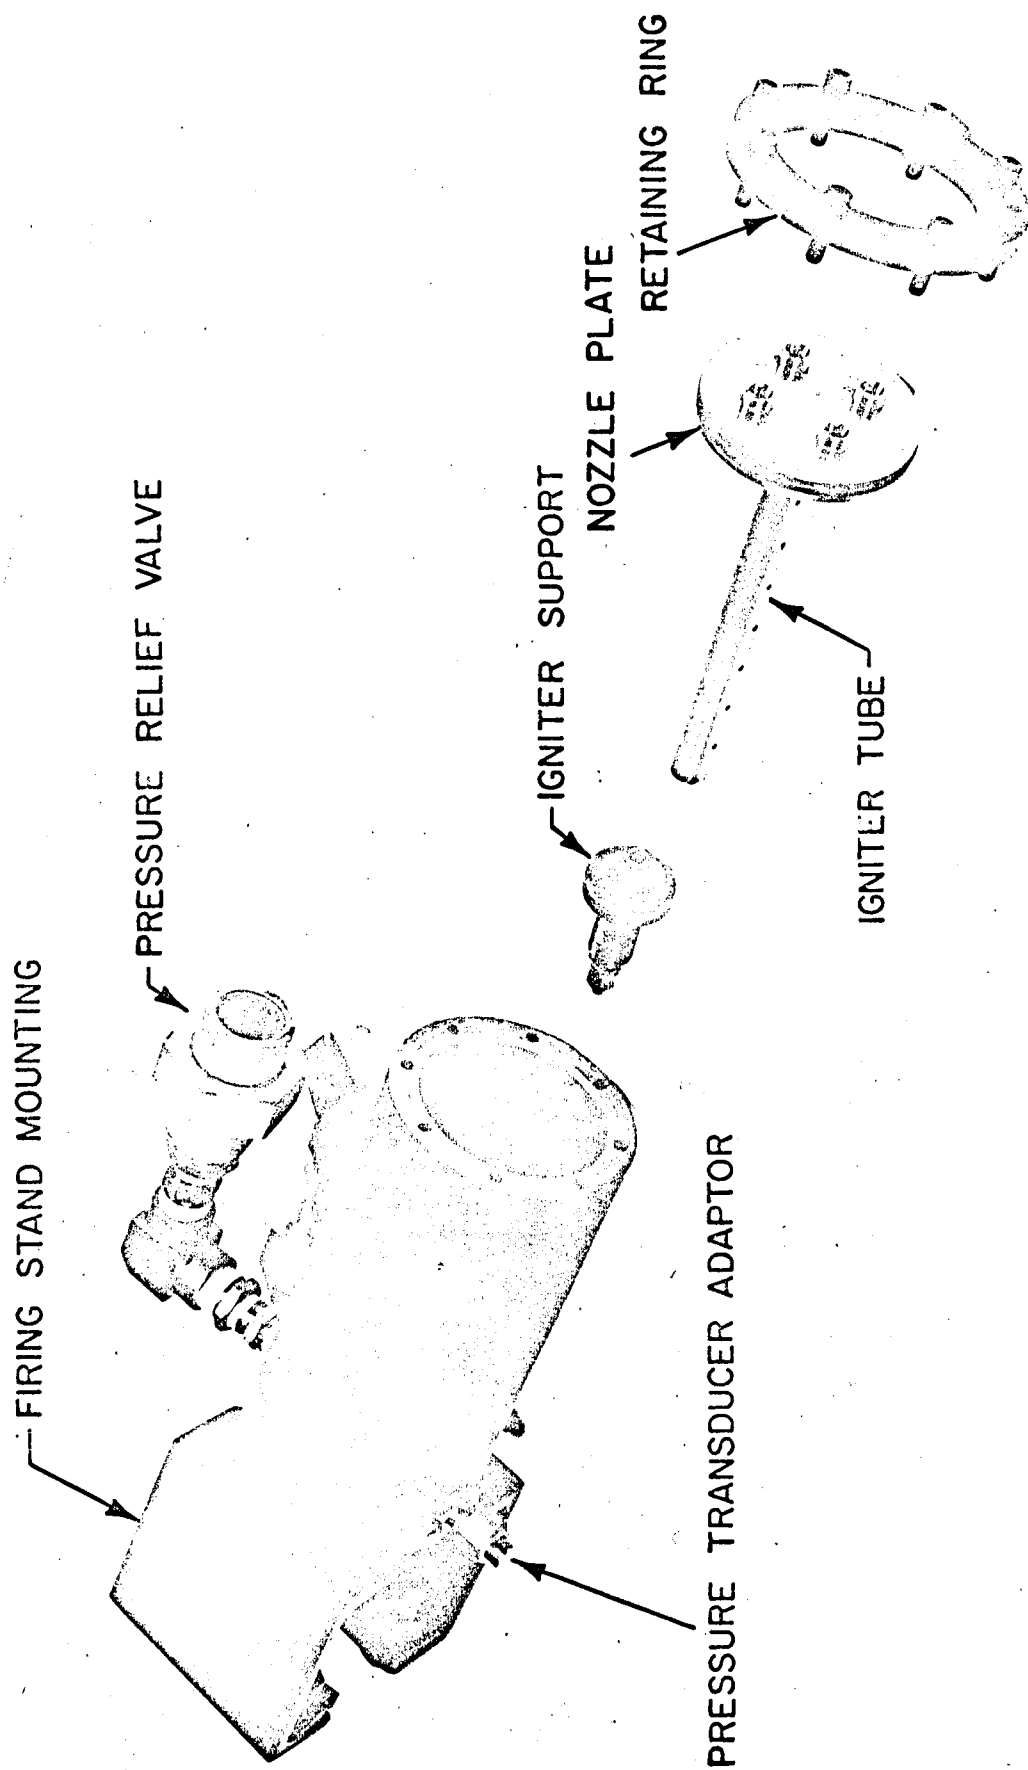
EXPLODED VIEW OF FRANKFORD ARSENAL COMEUSTOR
